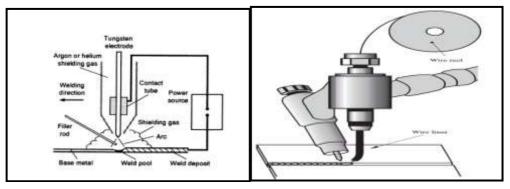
Schematic drawing of components and parameters and the automatic feeding of filler material for the TIG welding.
